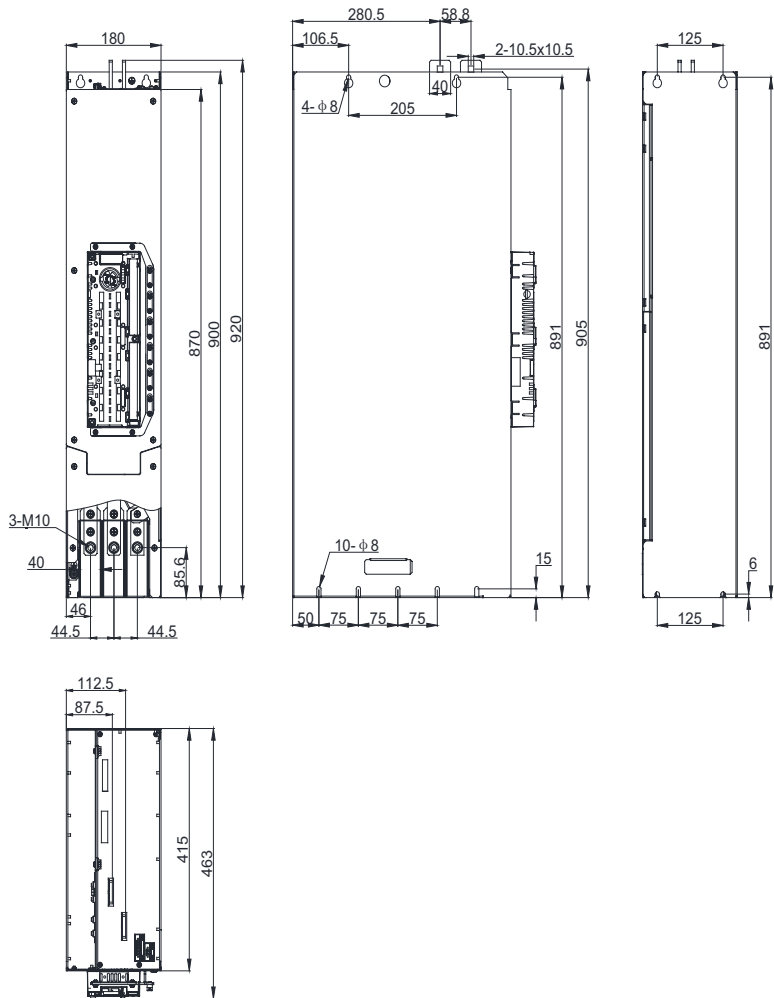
Outline dimensions of H7 DC choppers (mm)
